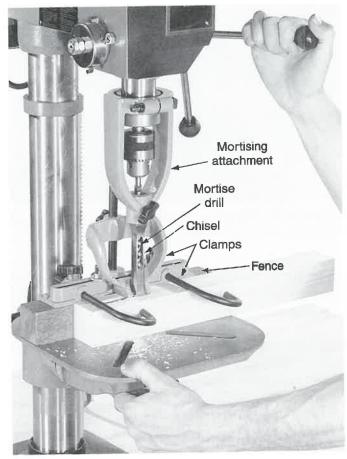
Mortising attachment on the drill press. (*Delta International Machinery Corp.*)
